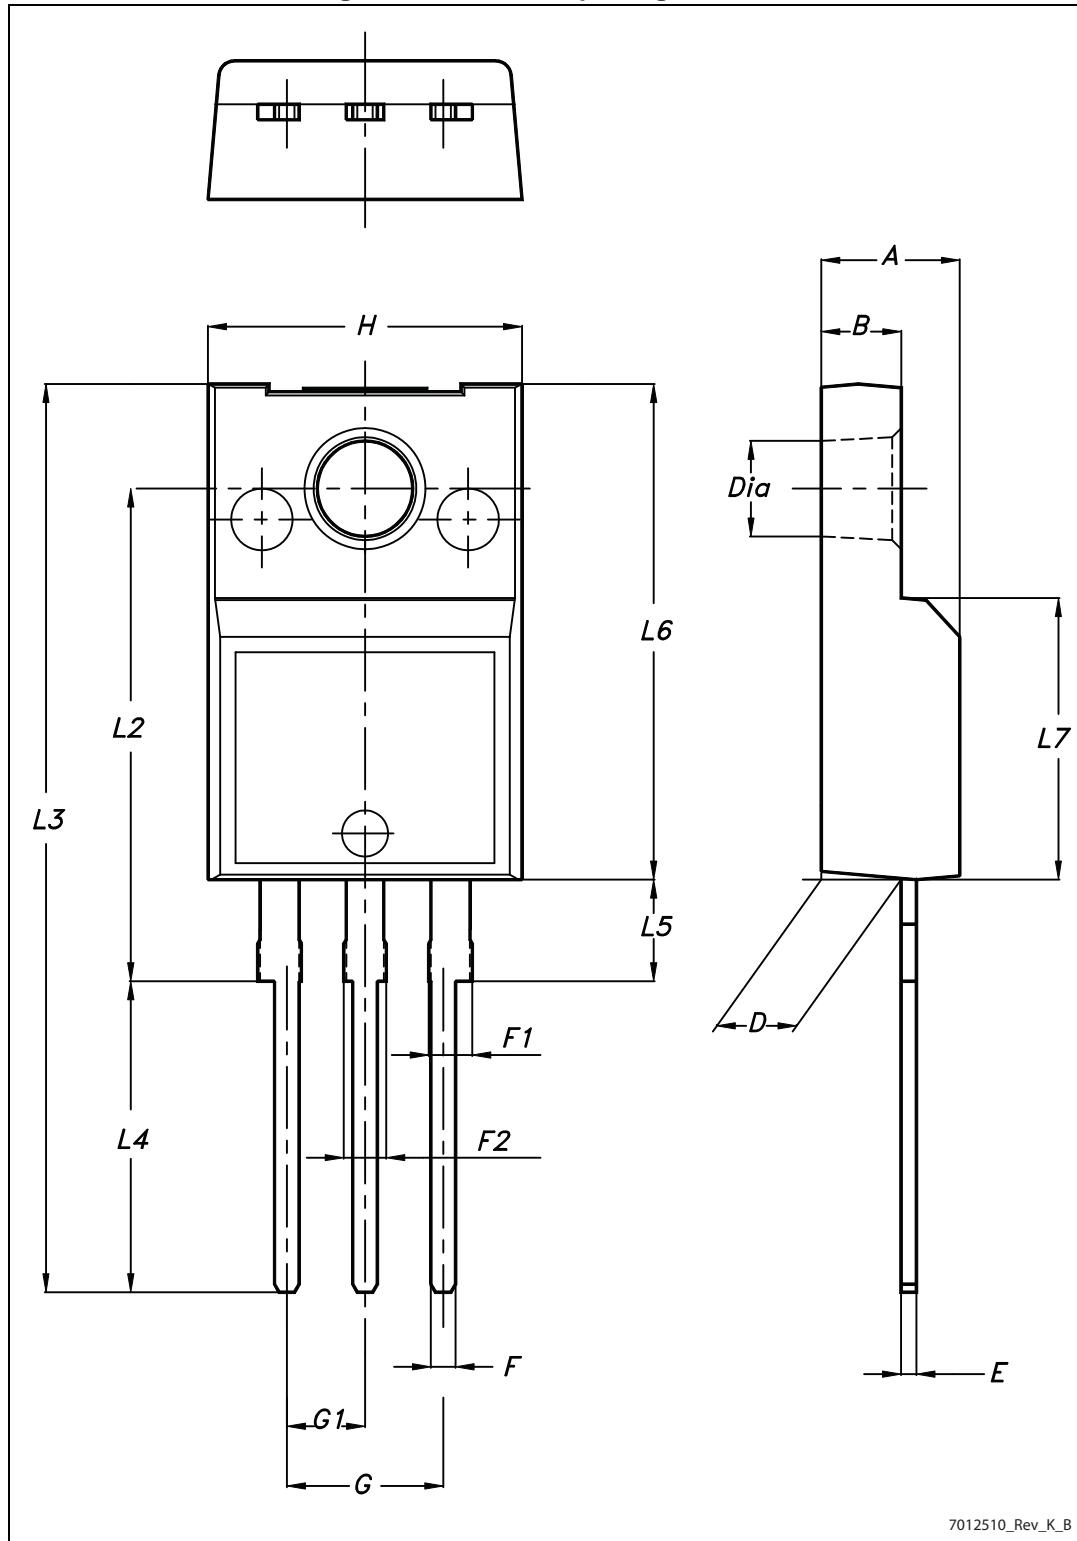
TO-220 (STD-ST single gauge) package outline
